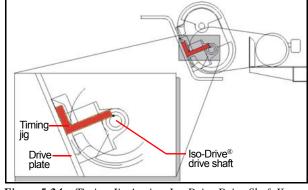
Timing Jig Against Iso-Drive Drive Shaft Key-Dual Units
